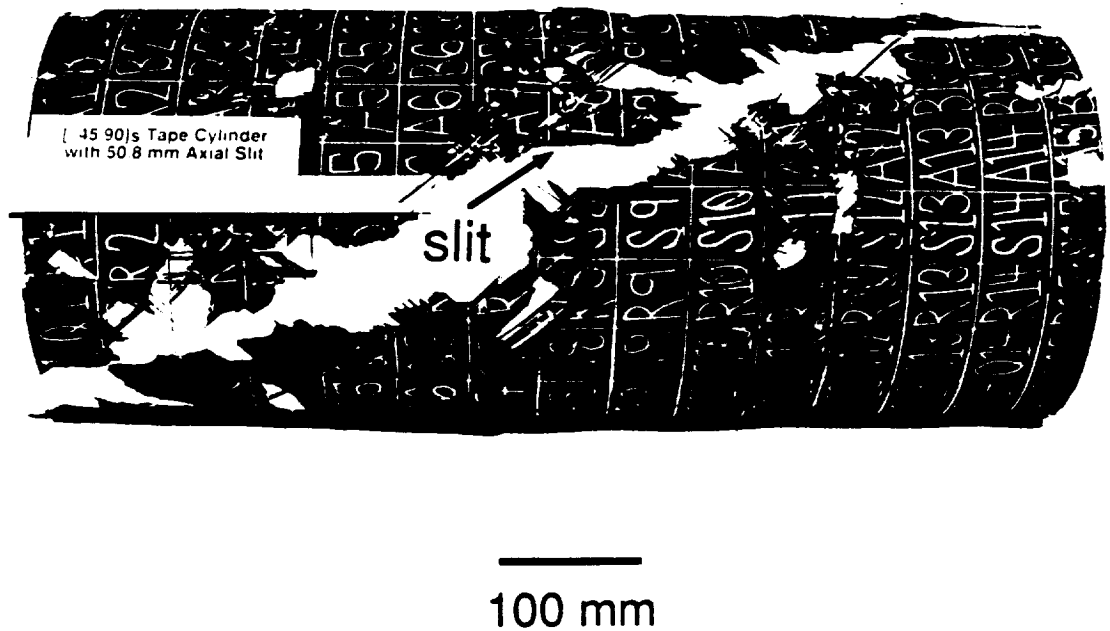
Post-test photograph of uniaxially loaded $[\pm 45/90]_s$ cylinder with 50.8 mm slit.
